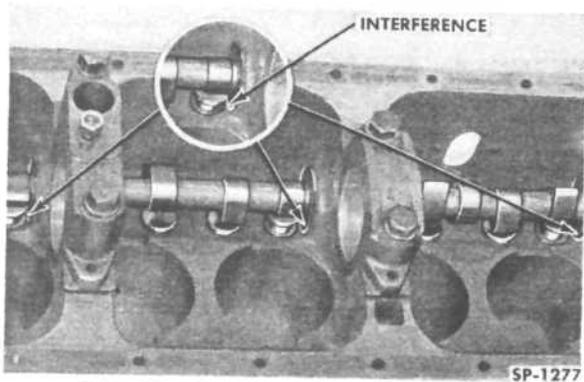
CAMSHAFT JOURNAL AND TAPPET INTERFERENCE
